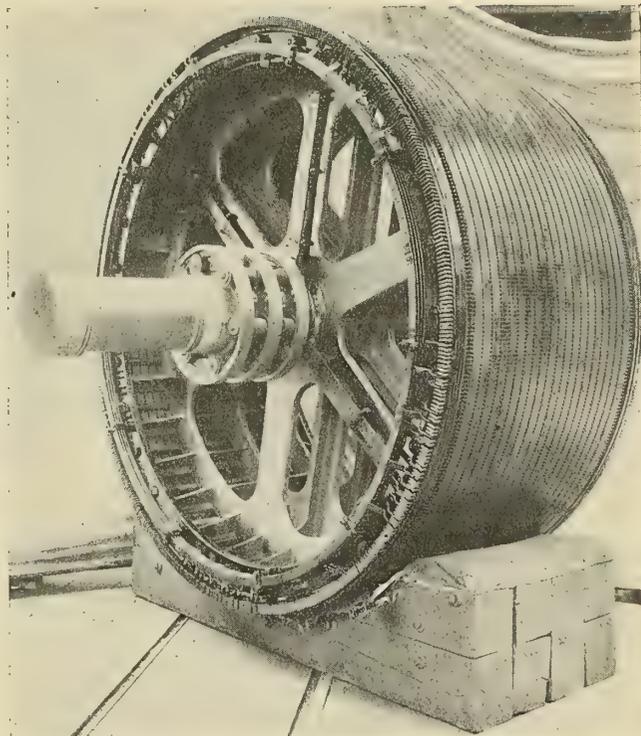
Induction Motor for Cargo Boat Drive. (Rotor-Collector End)
